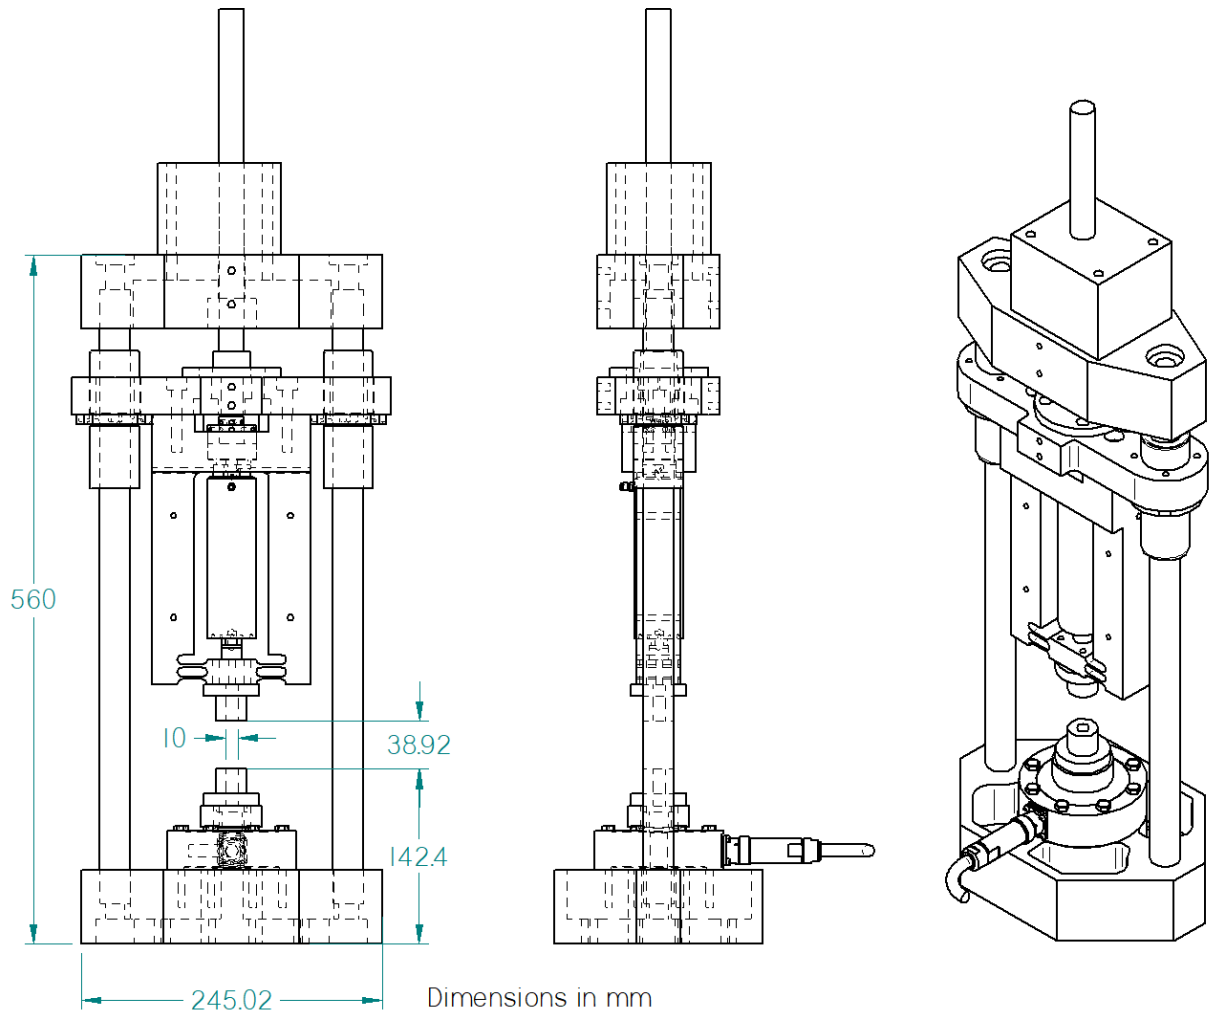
Drawings of the fatigue test machine as built; digital 3D embodiment by Fengchun Li
